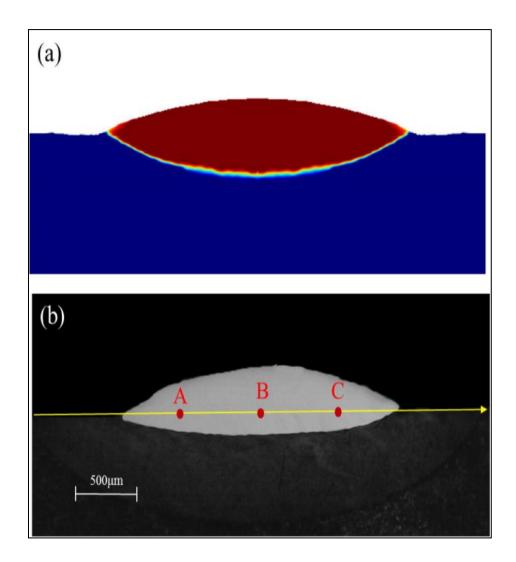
Cross-section of C-based layer cladded on the Steel surface (a) Numerical simulation and (b) experimental [139]
